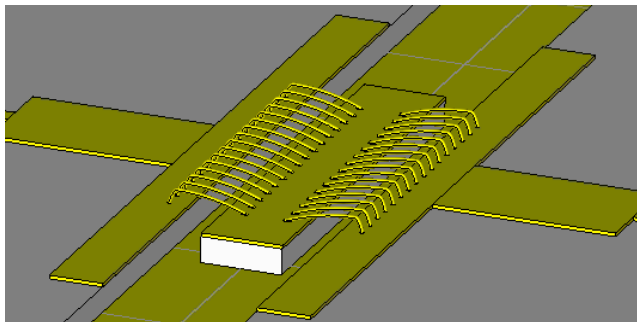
Drawing of the fabricated bondwire structure using full wave simulation CAD
